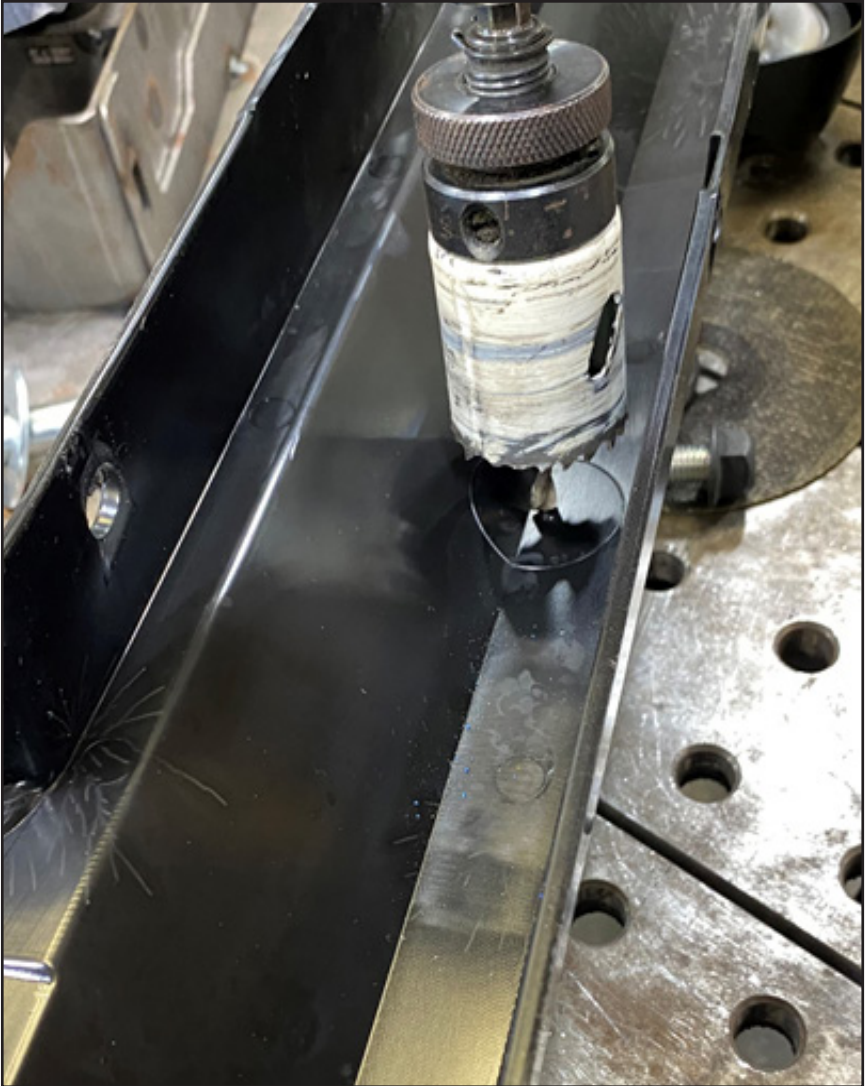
Use 1.5" Holesaw to cut holes in Quarter Panels
